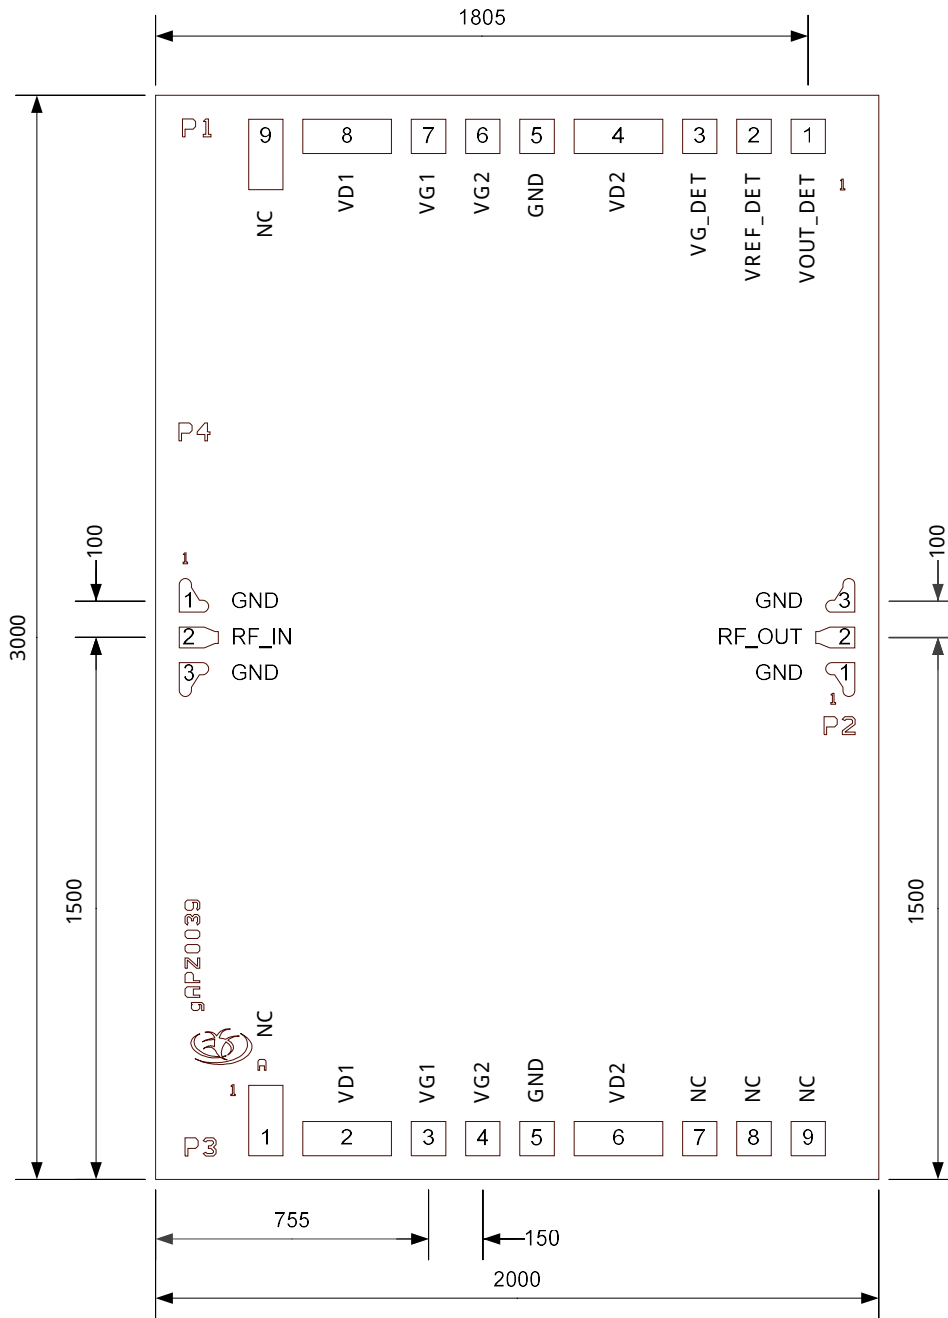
Outline drawing of the MMIC. Dimensions are in  $\mu\text{m}$ .
